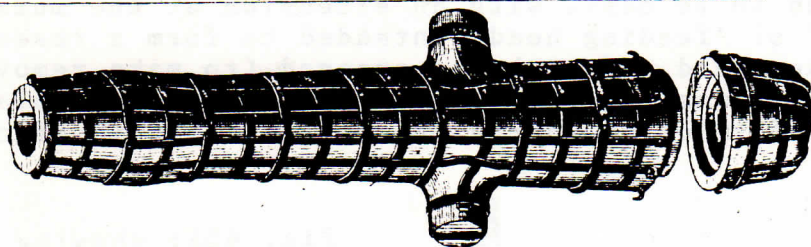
B: Finished mould showing staves and hoops necessary to withstand pressure of molten metal during the casting process. Also shown separate mould for the breech and cascable.
